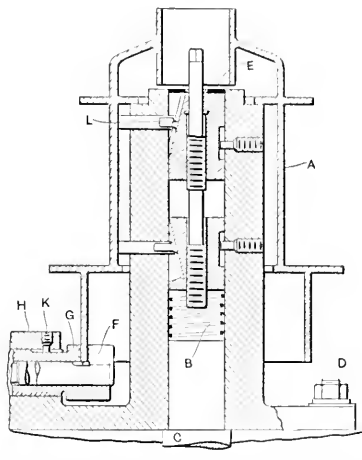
Vertical Fixture having Internal Clamping Pins and Hook-bolt Clamps for Lower Flange
